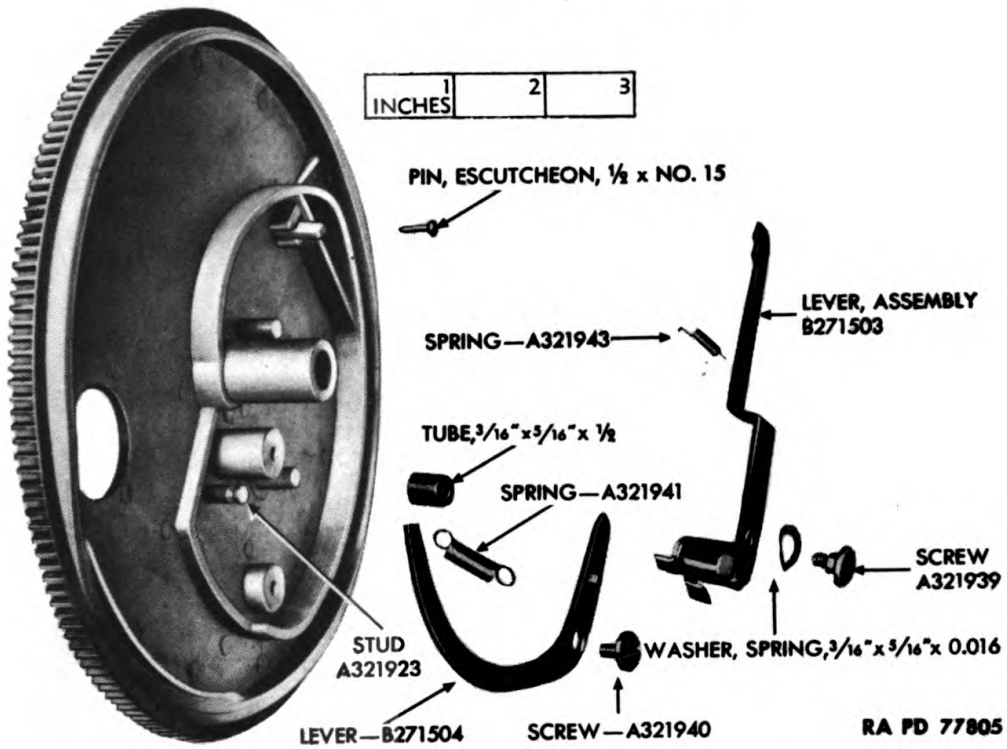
Removal of Principal Parts From Upper Side of Drive Gear
